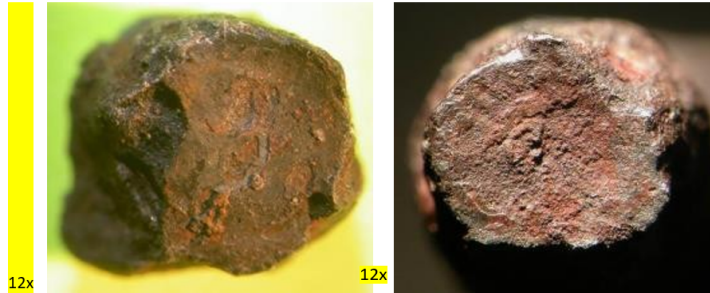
Fracture surface of broken spring sample B which experienced a Brittle fracture
